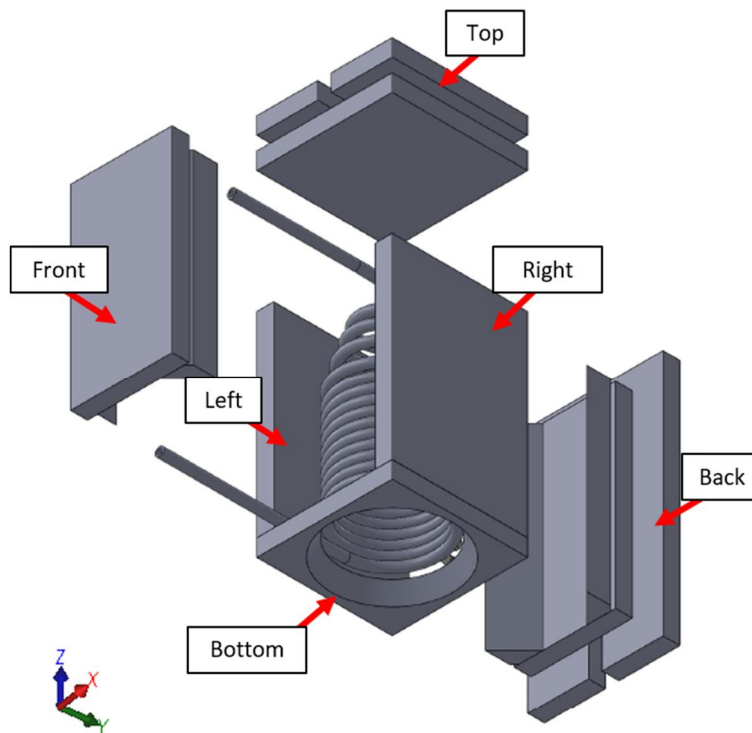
Exploded view of the receiver cavity depicting the sections of insulation.
